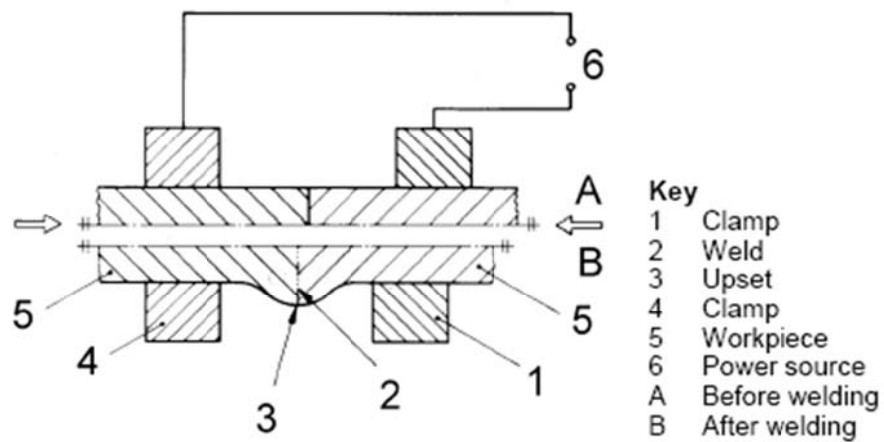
Resistance butt welding (ISO 669)
